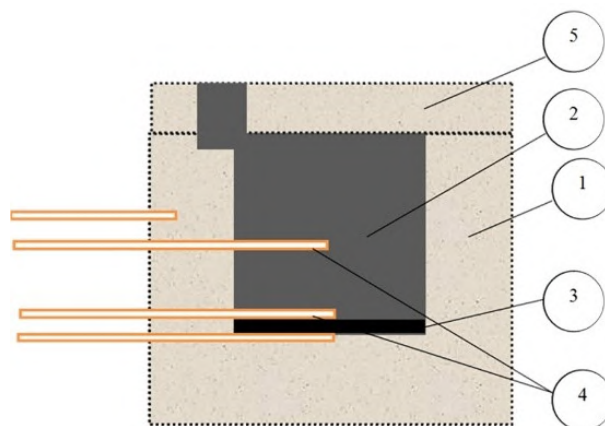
Scheme of experimental mold: 1 molding mixture; 2 thermite mixture; 3 metal base; 4 thermite charge; 5 lid of the mold.
